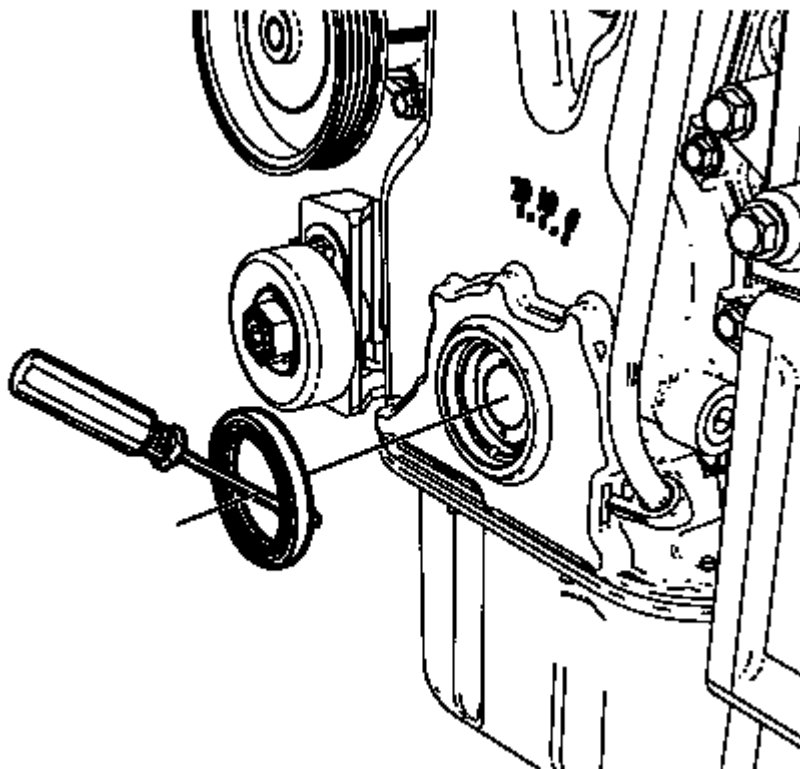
Using Flat-Bladed Tool To Remove Seal From Front Cover
